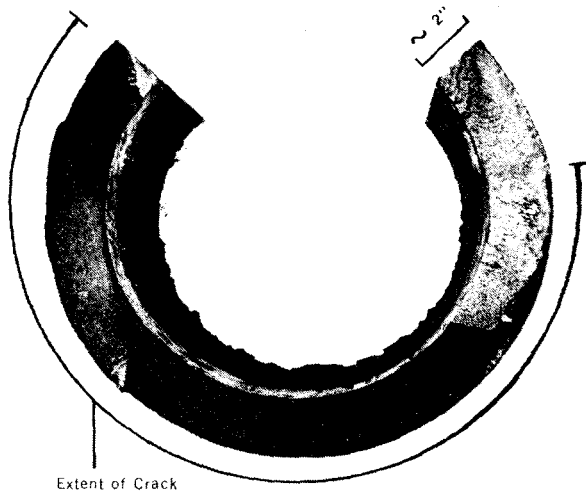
BROKEN SECTION OF TAILSHAFT SHOWING EXTENT OF CRACKING
